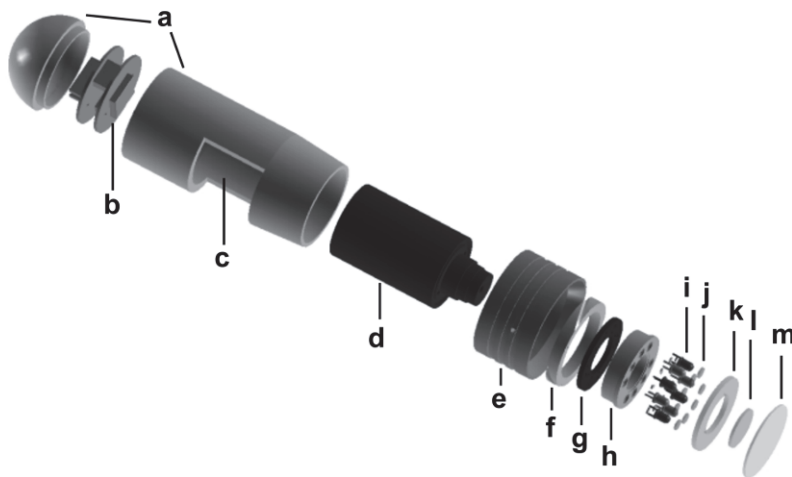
Explosion drawing of the PreSens USB-microscope “VisiSens” optimized for imaging of fluorescent sensor foils: (a) aluminium housing, (b) RGB CMOS-chip, (c) opening for manual focus, (d) microscope lense, (e) filter tube, (f) mounting and adjustment ring (g) transmitter PCB, (h) LED reflector block, (i) LEDs, (j) diffusor, (k) short pass excitation filter, (l) long pass emission filter and (m) sapphire glass.
